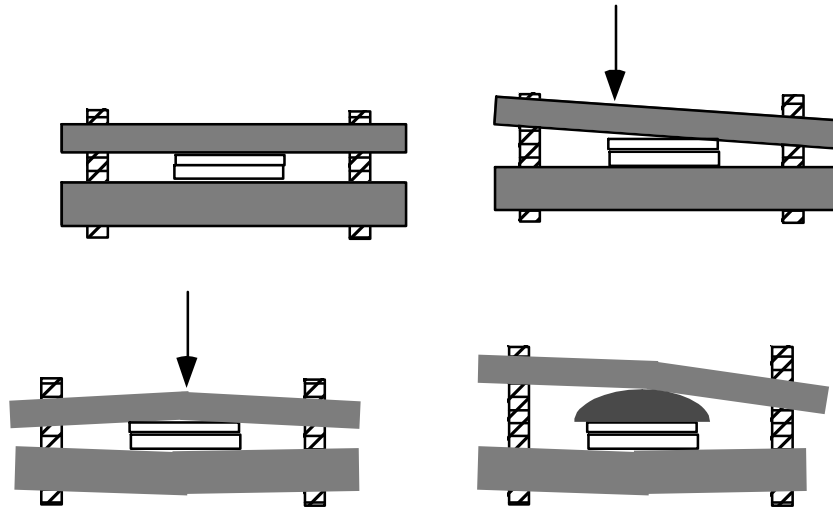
(a,b,c,d). a) Simple parallel plate wafer fusion fixture.
